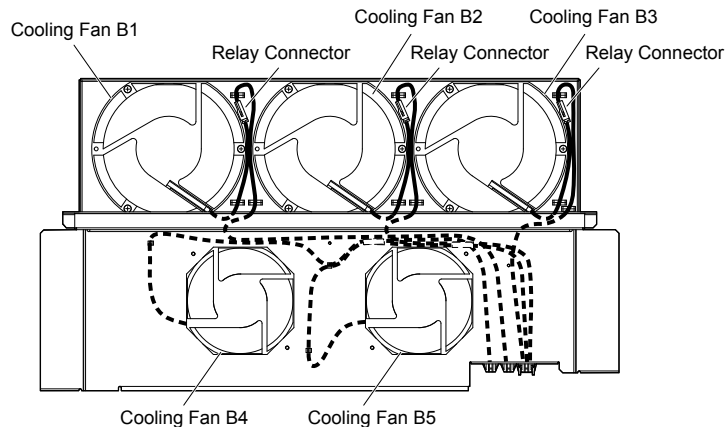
Cooling Fan Wiring: 4A0515 and 4A0675
